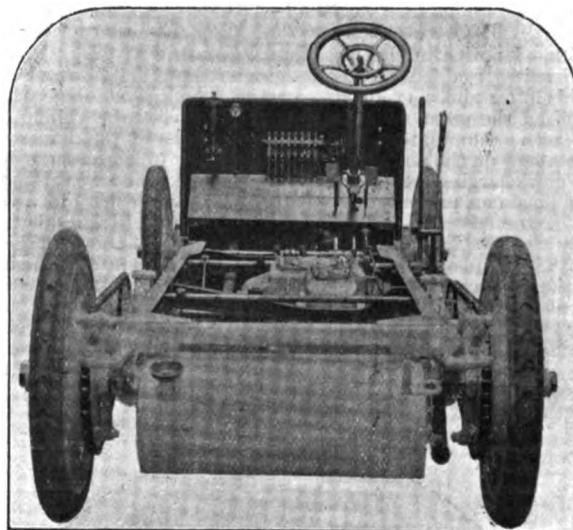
Rear View of Chassis of Daimler-Mercedes 30-h.p. Car.
